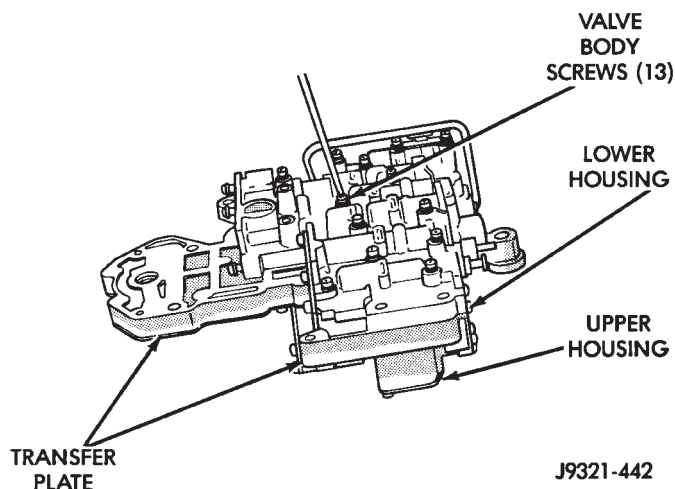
Installing Lower Housing On Transfer Plate And Upper Housing
